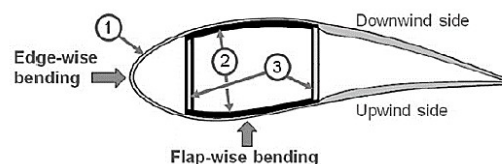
Cross section of a blade with references to the airfoil shell, spar flanges, and shear webs: #s 1, 2 and 3 respectively [3].
